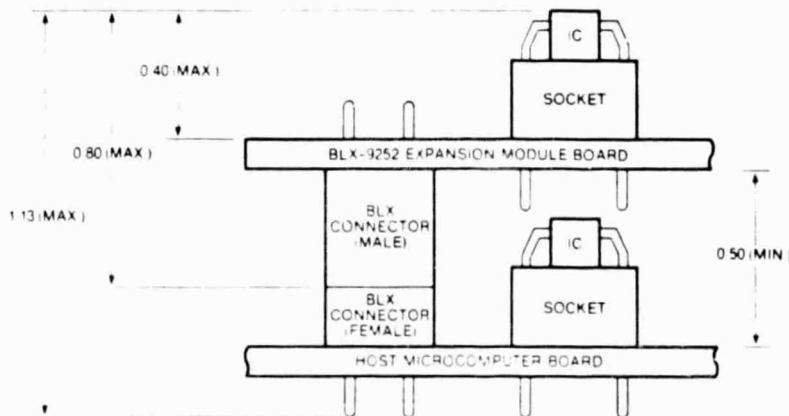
BLX-9252 Expansion Module Mounting Clearances (inches)
